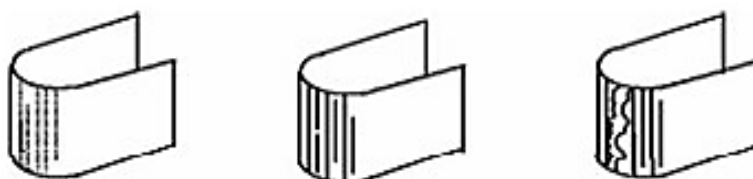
Bend test indicator, (a) no crack, (b) minor cracking, (c) cracks with lifting [3]
